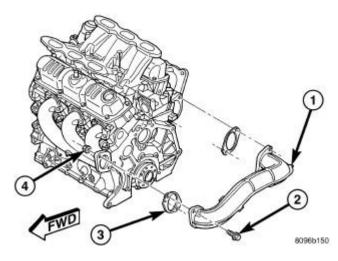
CROSS-OVER PIPE Courtesy of CHRYSLER LLC
